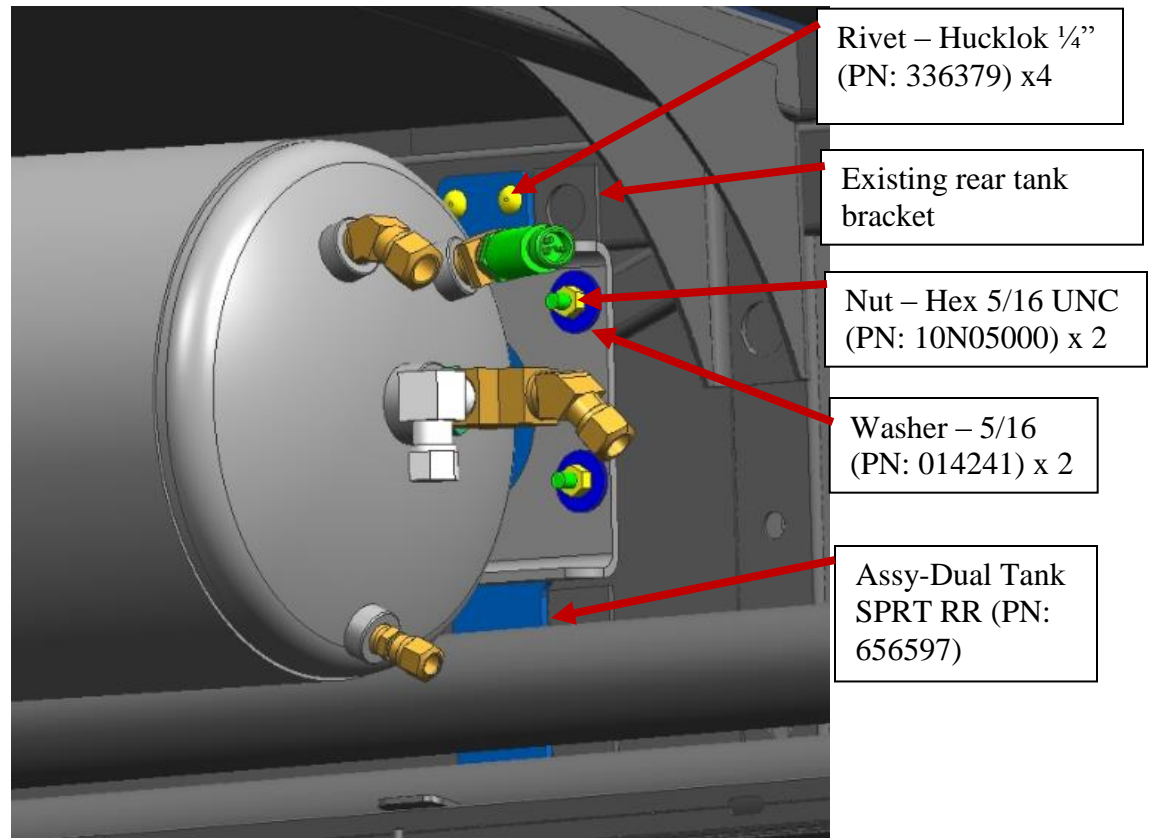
B: SHOWN A VIEW OF DETAIL B. REFER TO DIMENSIONS FOR MOUNTING OF THE REAR BRACKET
